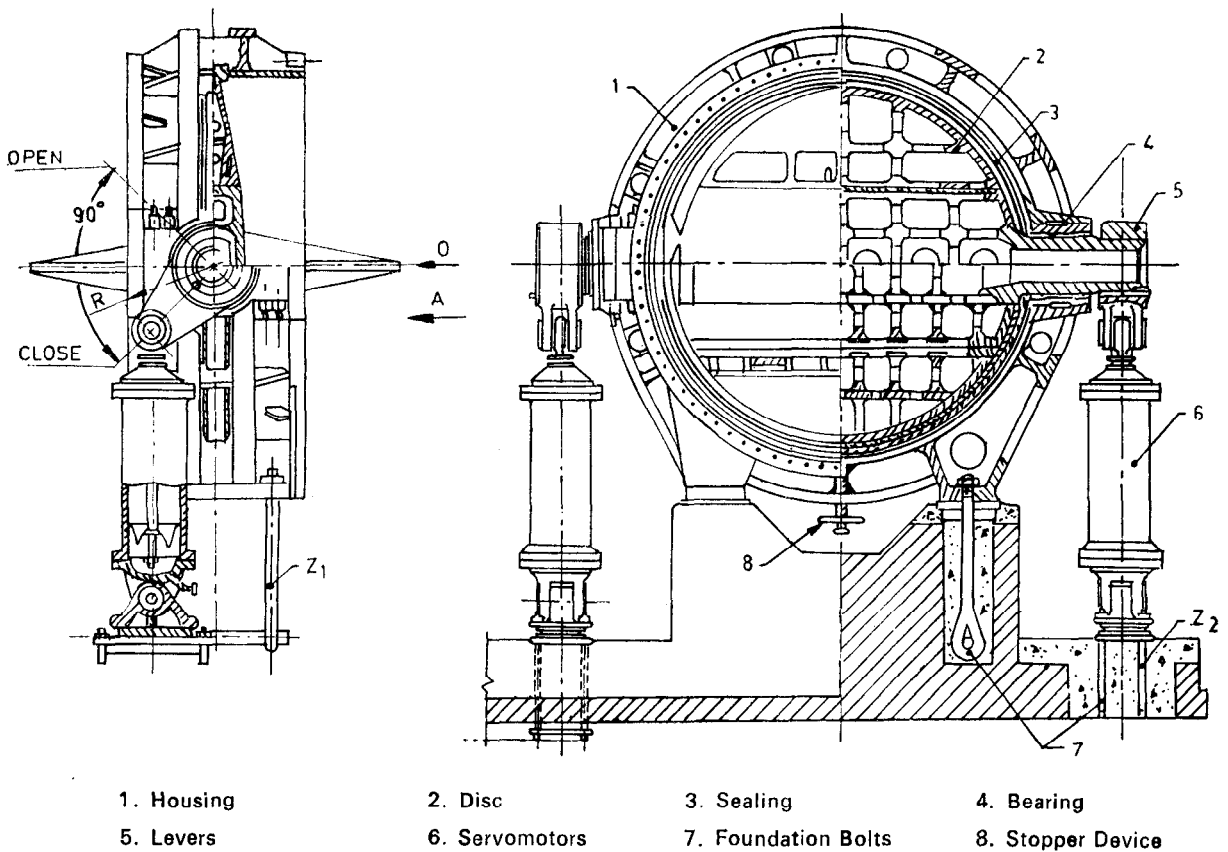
TYPICAL DETAILS OF BUTTERFLY VALVE — DISC-SYMMETRICAL TYPE
